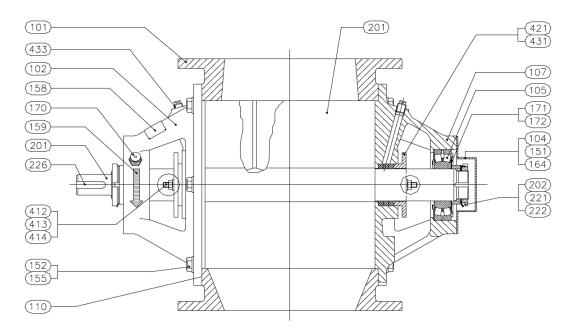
General assembly AL-series / BL-series HT 250°C
